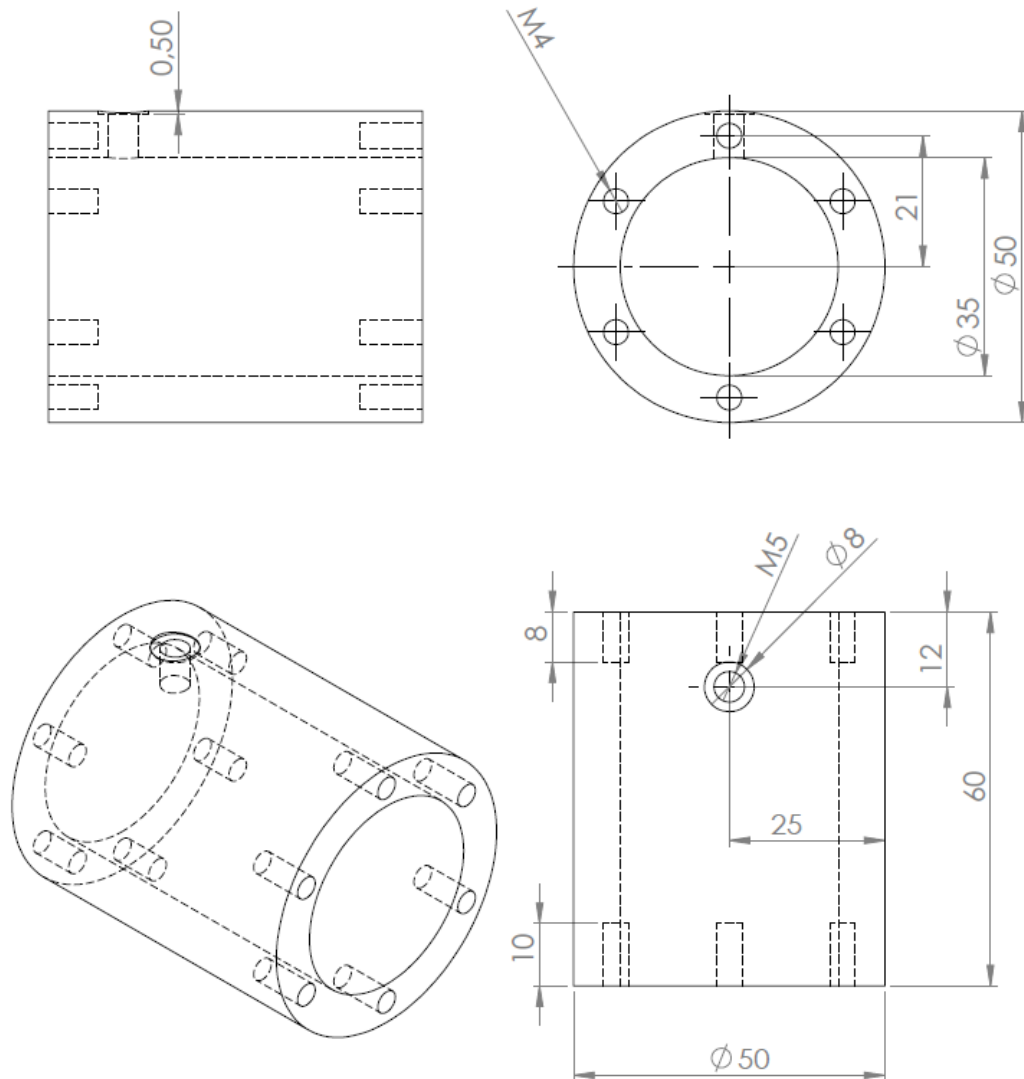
Drawing of the pressure chamber. The pressure chamber is made of 6082T6 AlMgSi.
